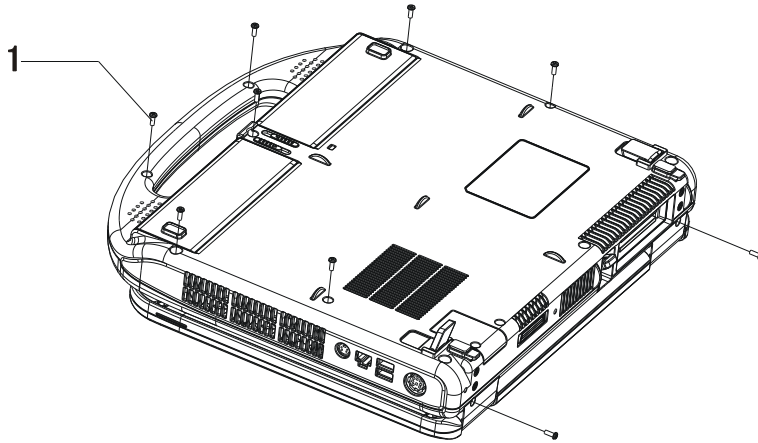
Removing the Top Cover Assembly of Main Unit (1)
